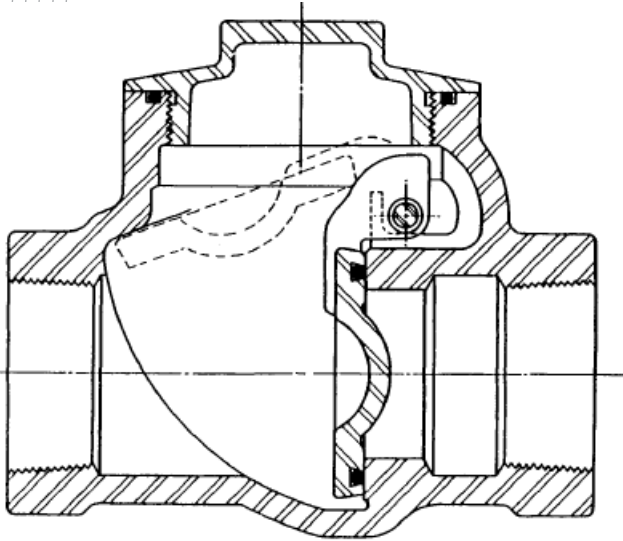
Swing check valve. (Courtesy of Judd Valve Co., Inc.)
